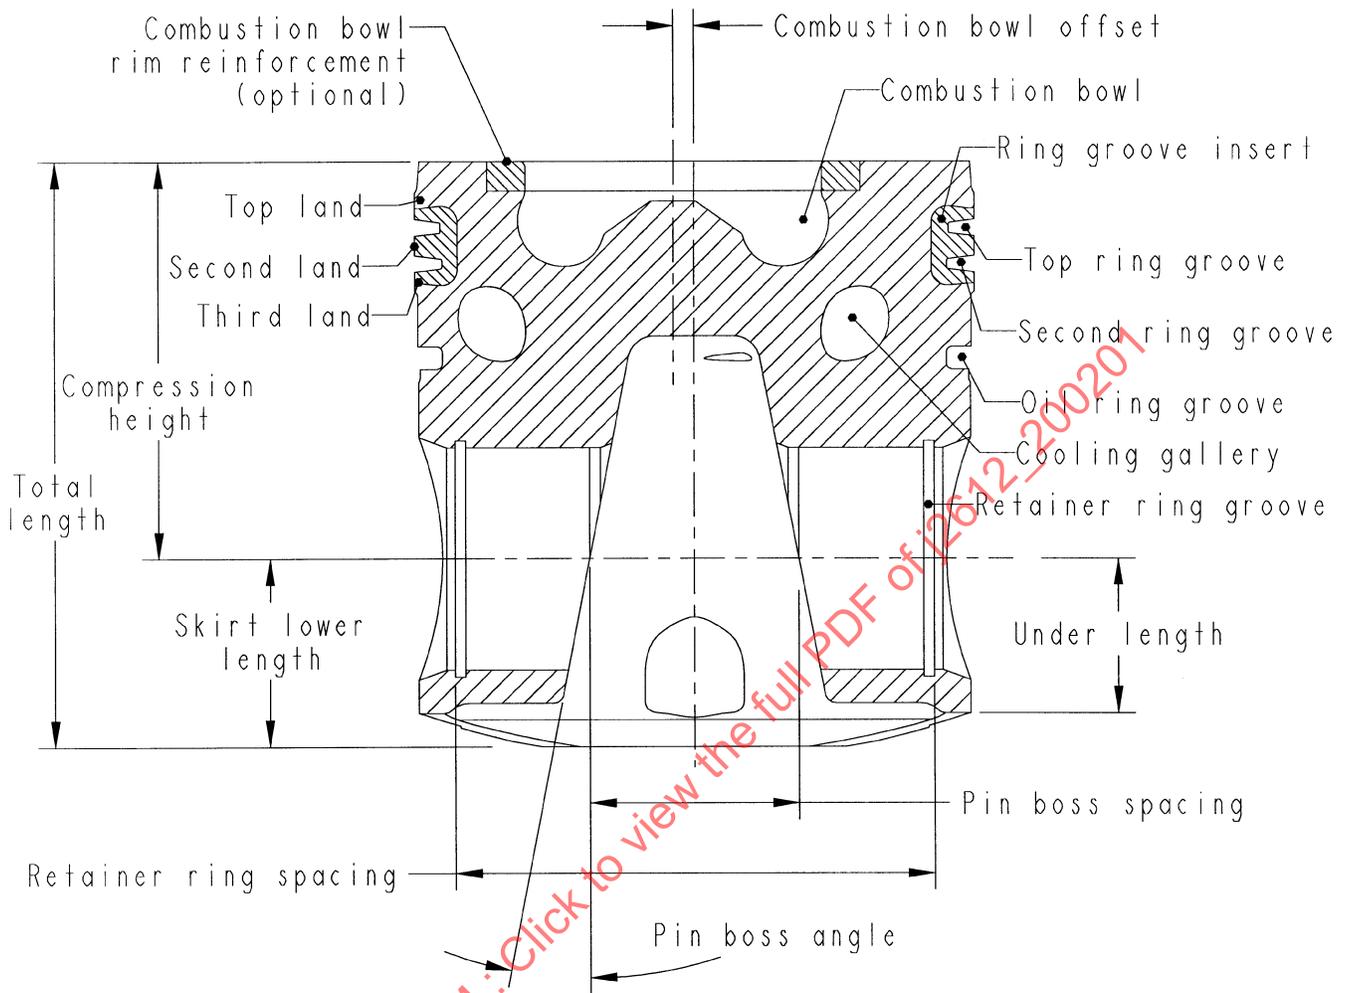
MEDIUM/HEAVY DUTY MONOBLOCK PISTON: VIEW ALONG THRUST AXIS
